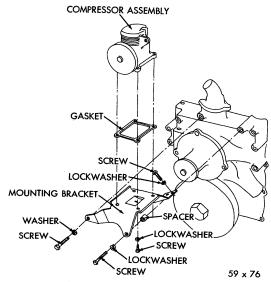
Compressor Mounting (without Air Conditioning — All Models)
